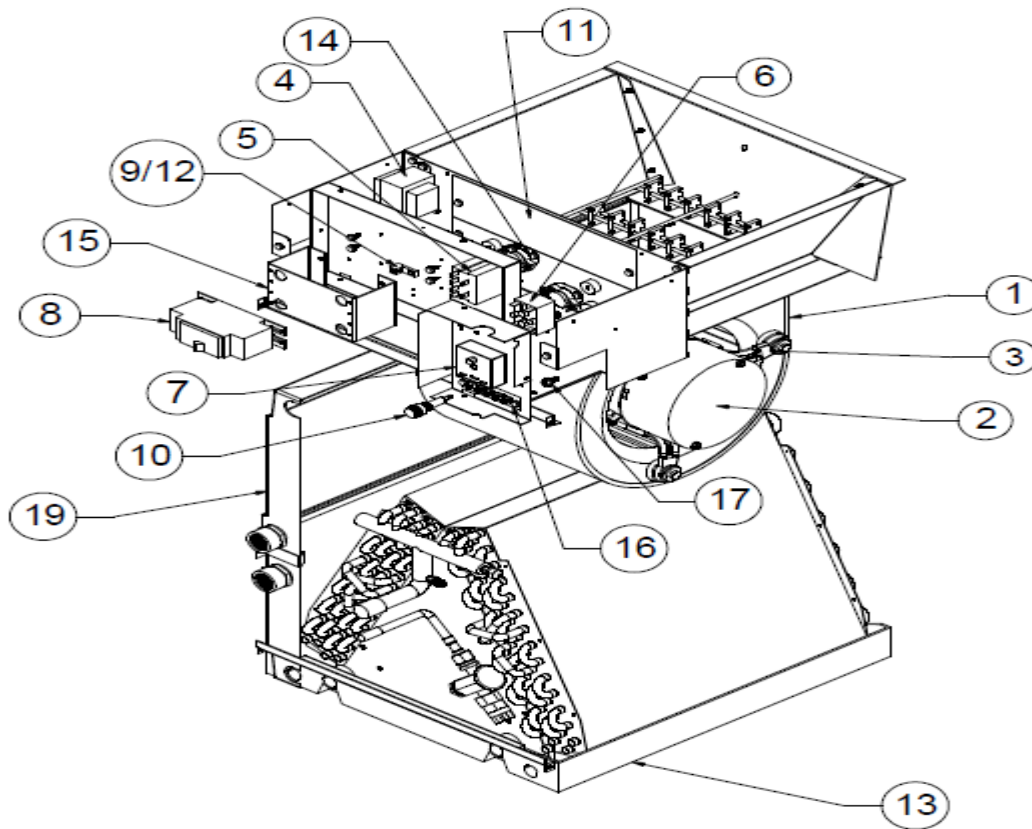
ML 30-36 Electric Heat Air Handler Repair Parts Schematic
